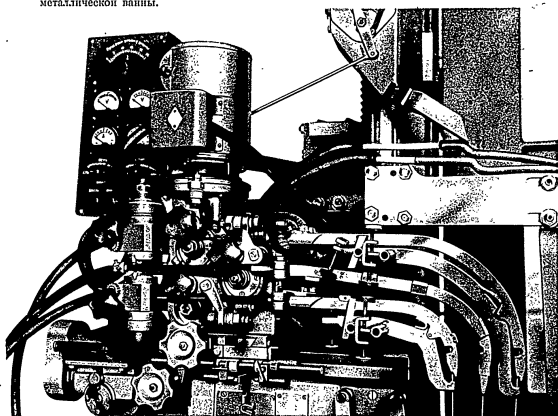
Mechanism of electrode wire feeding and current-leading electrode holder of the А-372 Welding Apparatus
